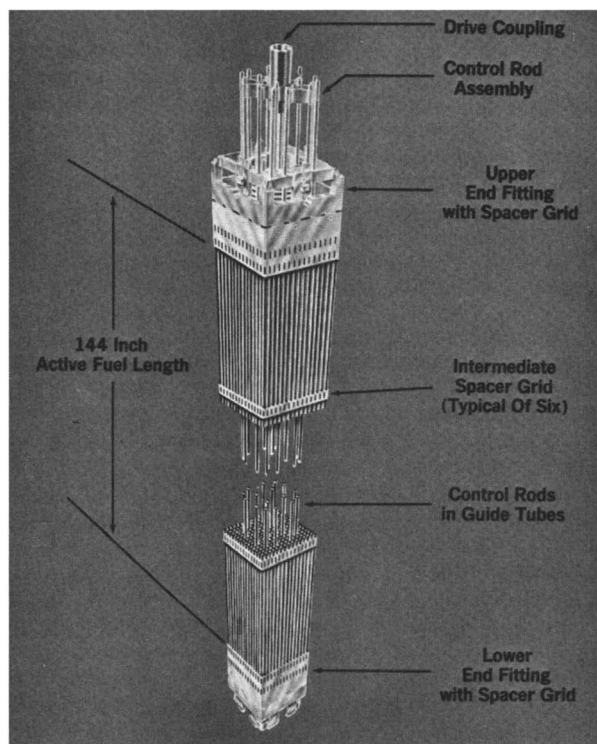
Fuel Assembly - cutaway showing partially inserted control rod assembly.
